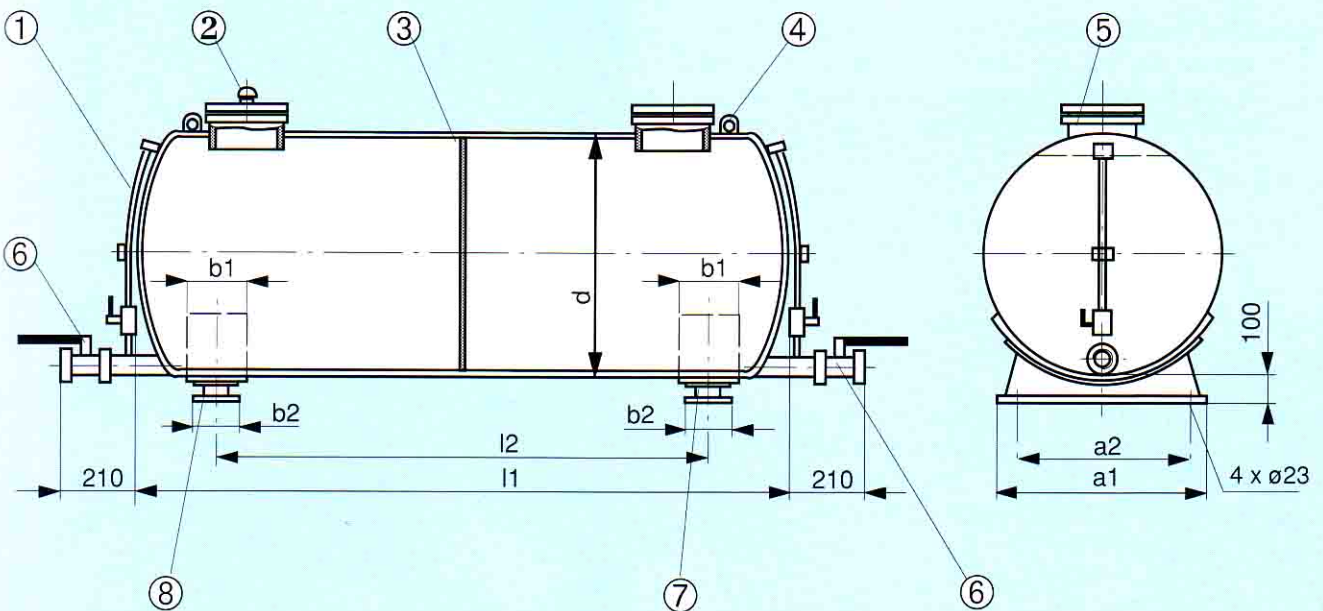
Principal dimensions of steel cylindrical fluid tanks
